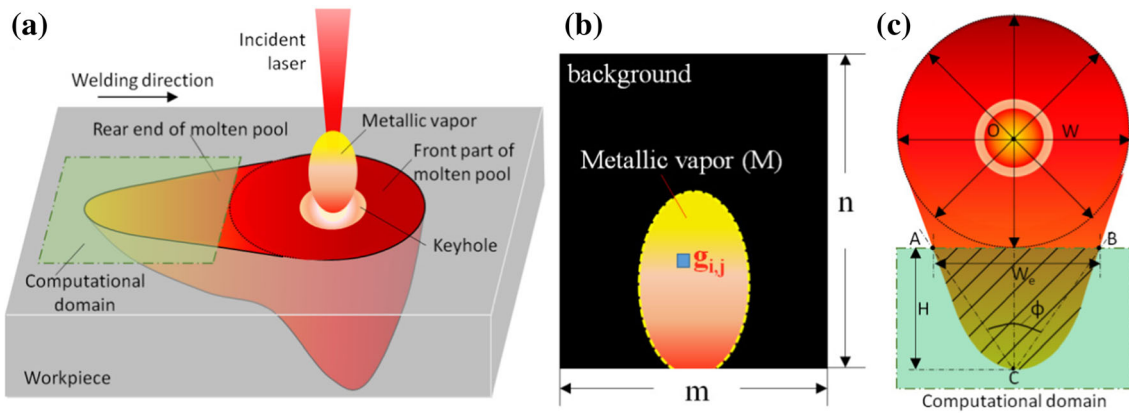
The static features of molten pool and metallic vapor. a General layout of laser welding. b Sketch of metallic vapor. c Sketch of molten pool
